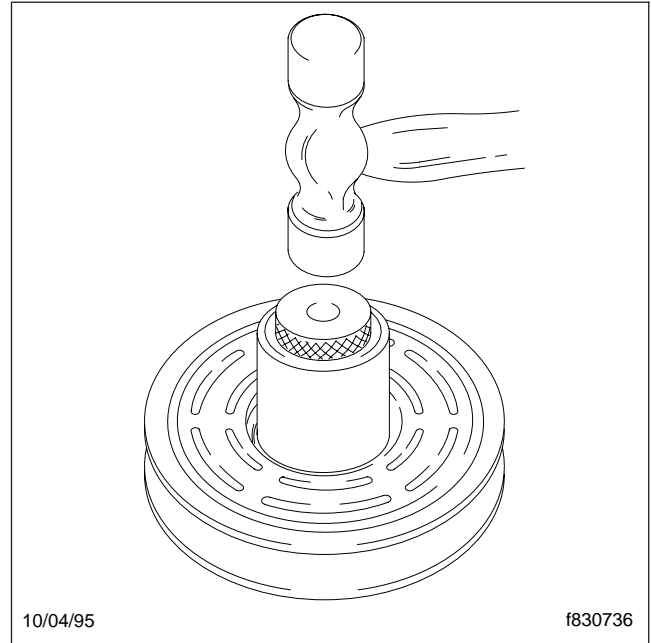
, Drive the Pulley Down Against the Front Housing Step.
